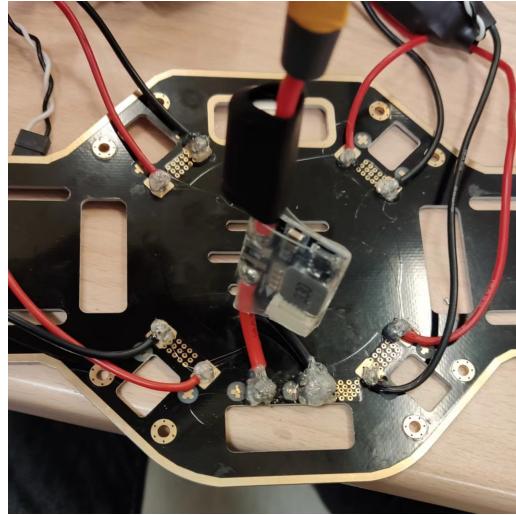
Soldering PM02 on bottom board (finish of step 3)
